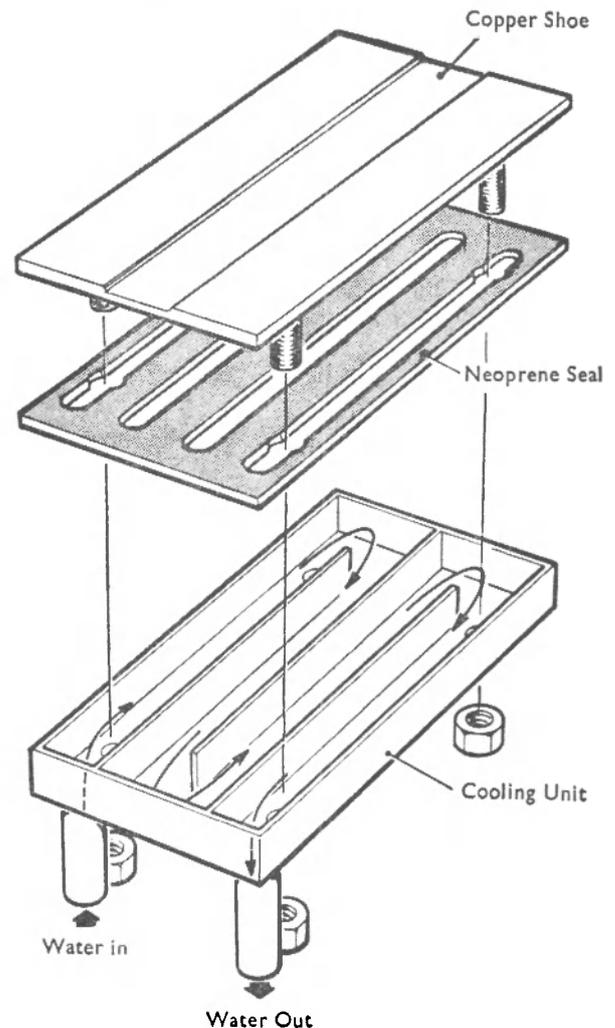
The component parts of fabricated cooling shoes for consumable guide welding.
